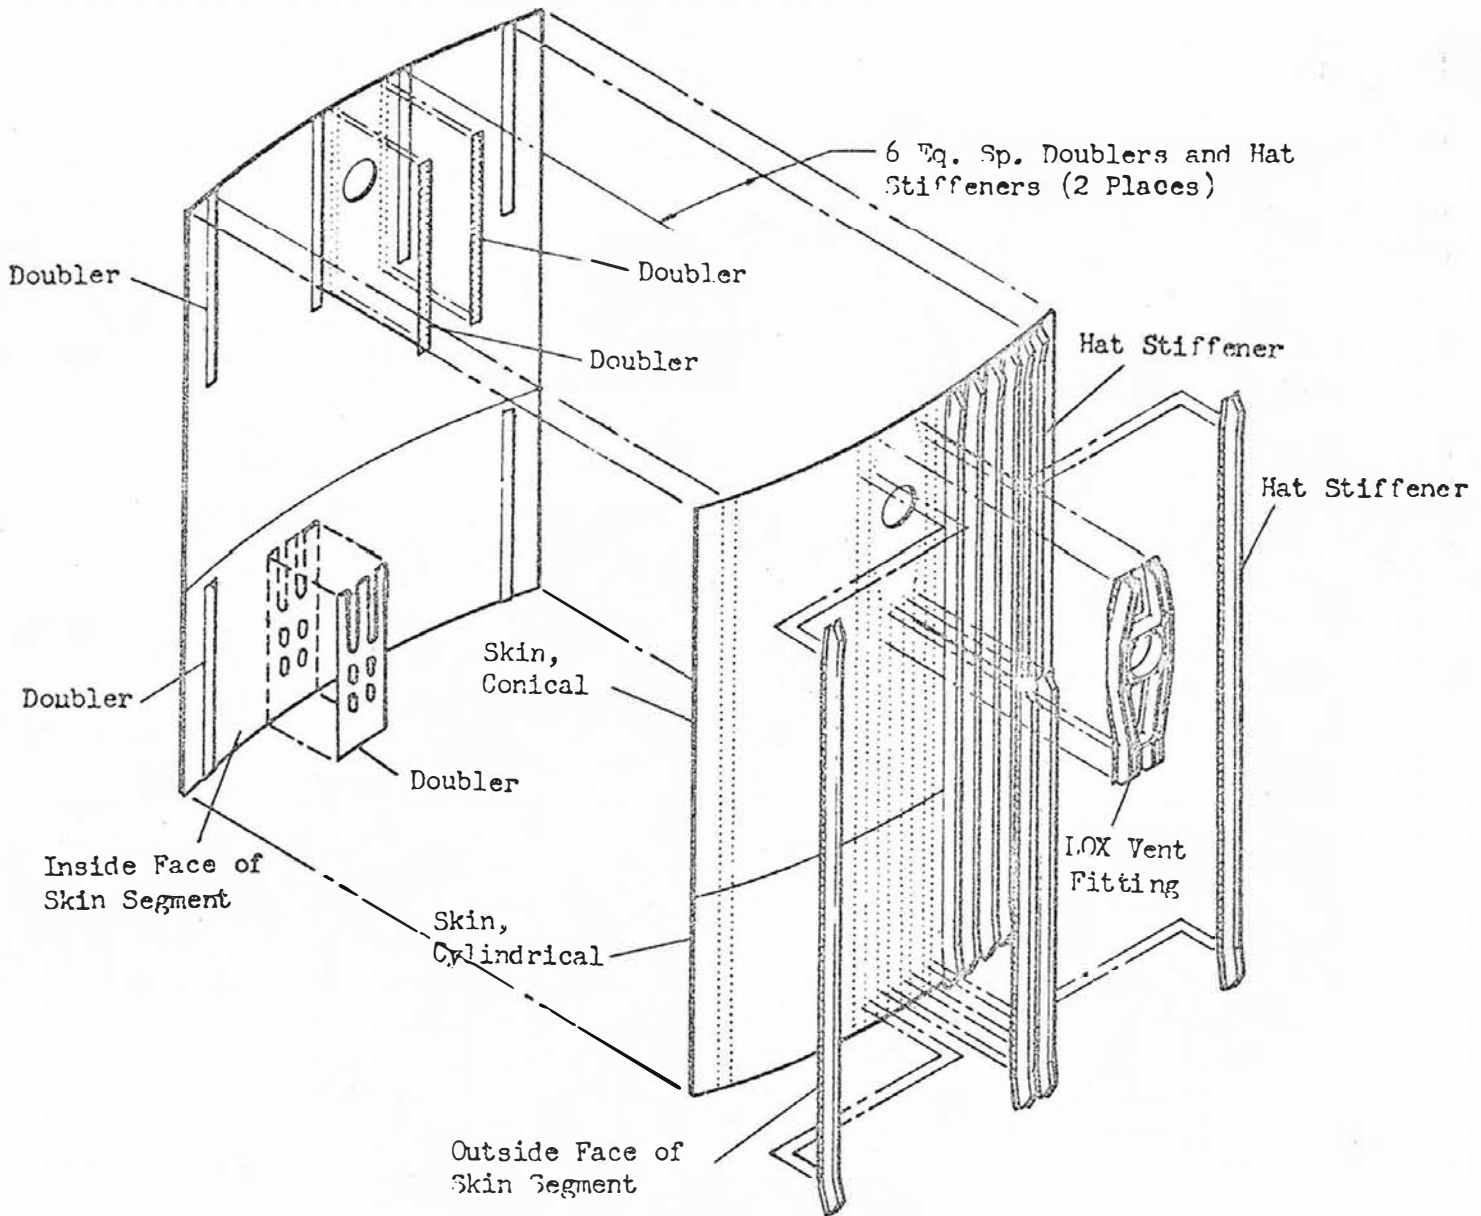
Skin Segment Assembly (LOX Vent Opening Fitting) 60B15000-1-900
